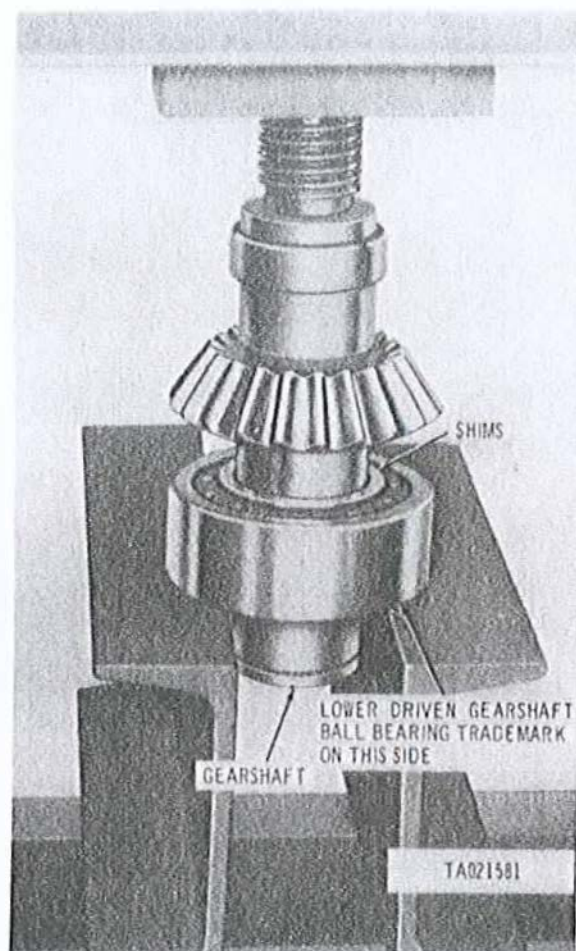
Pressing fan driven gearshaft into lower gearshaft ball bearing.
